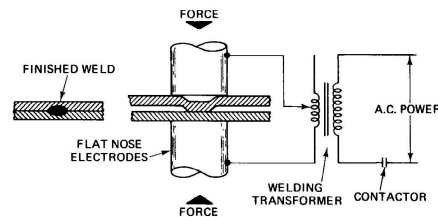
A variant of the spot welding technique - the projection spot welding method (Cary, 1994).
